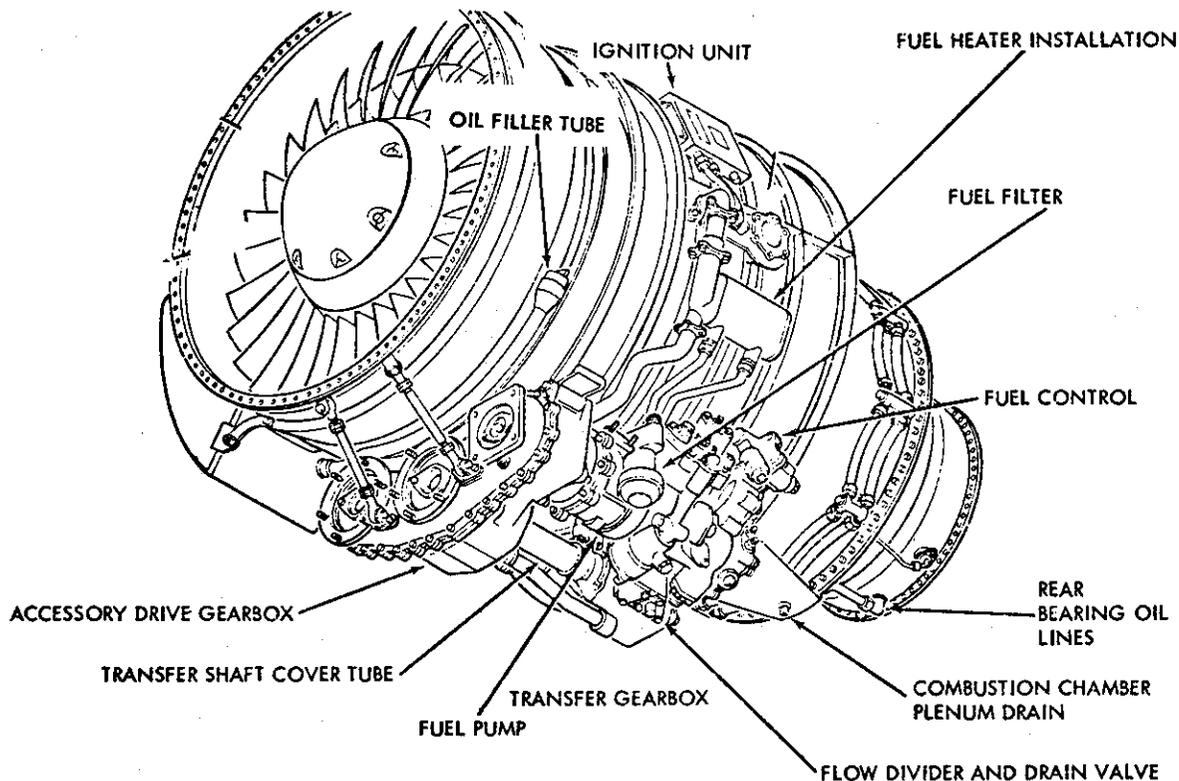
Accessory arrangement on an axial-flow engine.
